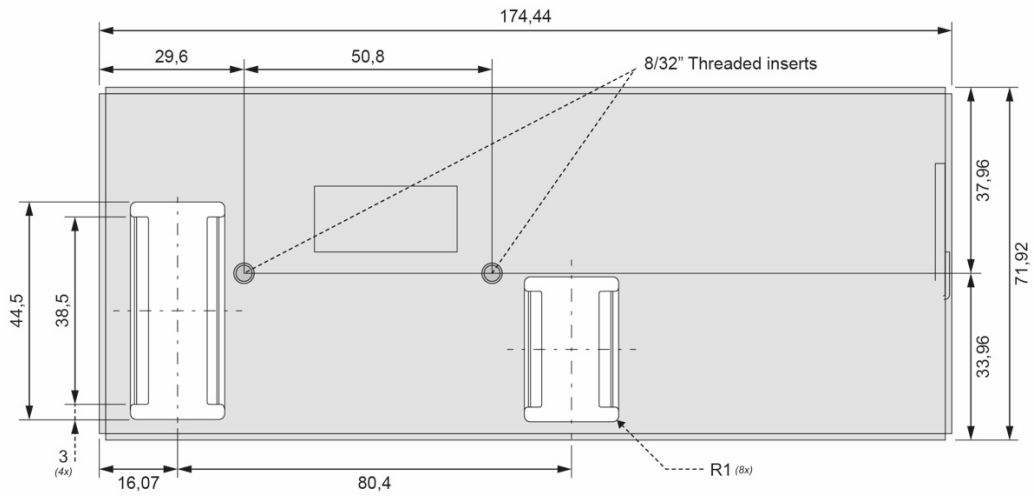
2-channel 75W /B: dimensions, bottom view
